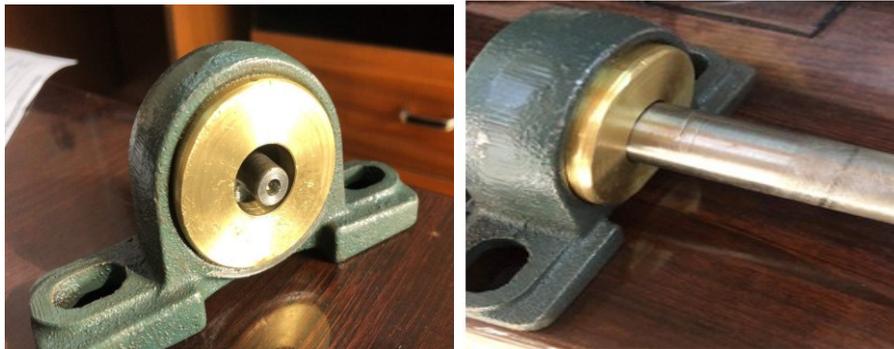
manufacturing process of new design prototype of compound journal bearing using high accuracy cutting tools machine
